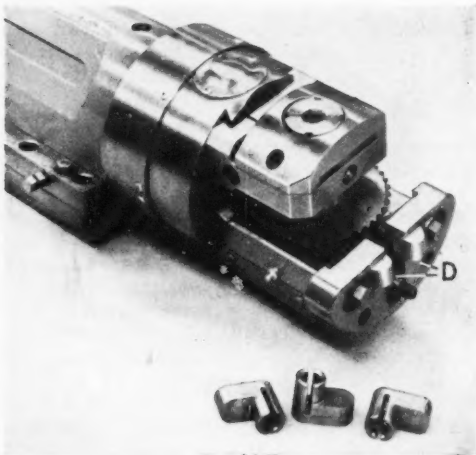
A Front View of the Milling Attachment Seen at C, Fig. 1, with Some Finished Parts
